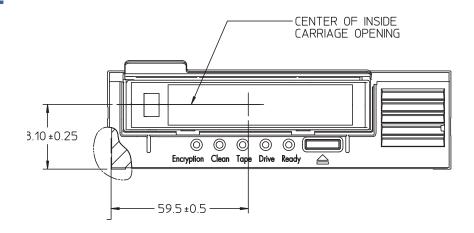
LTO-5 Half-Height Drive Dimensions (side)
